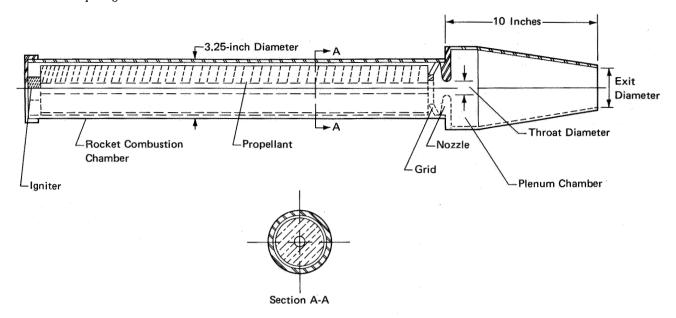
Cross section of 3.25-inch rocket motor modified to simulate a turbojet engine.
